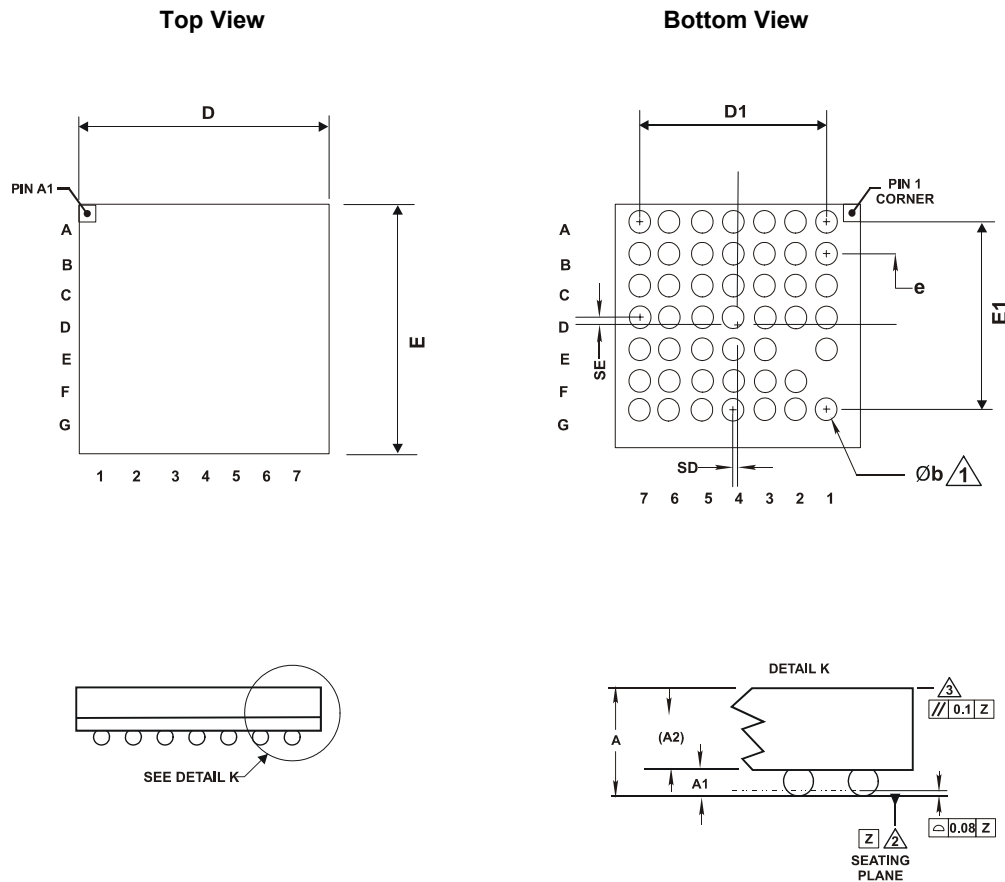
BlueCore2-ROM VFBGA Package Dimensions
